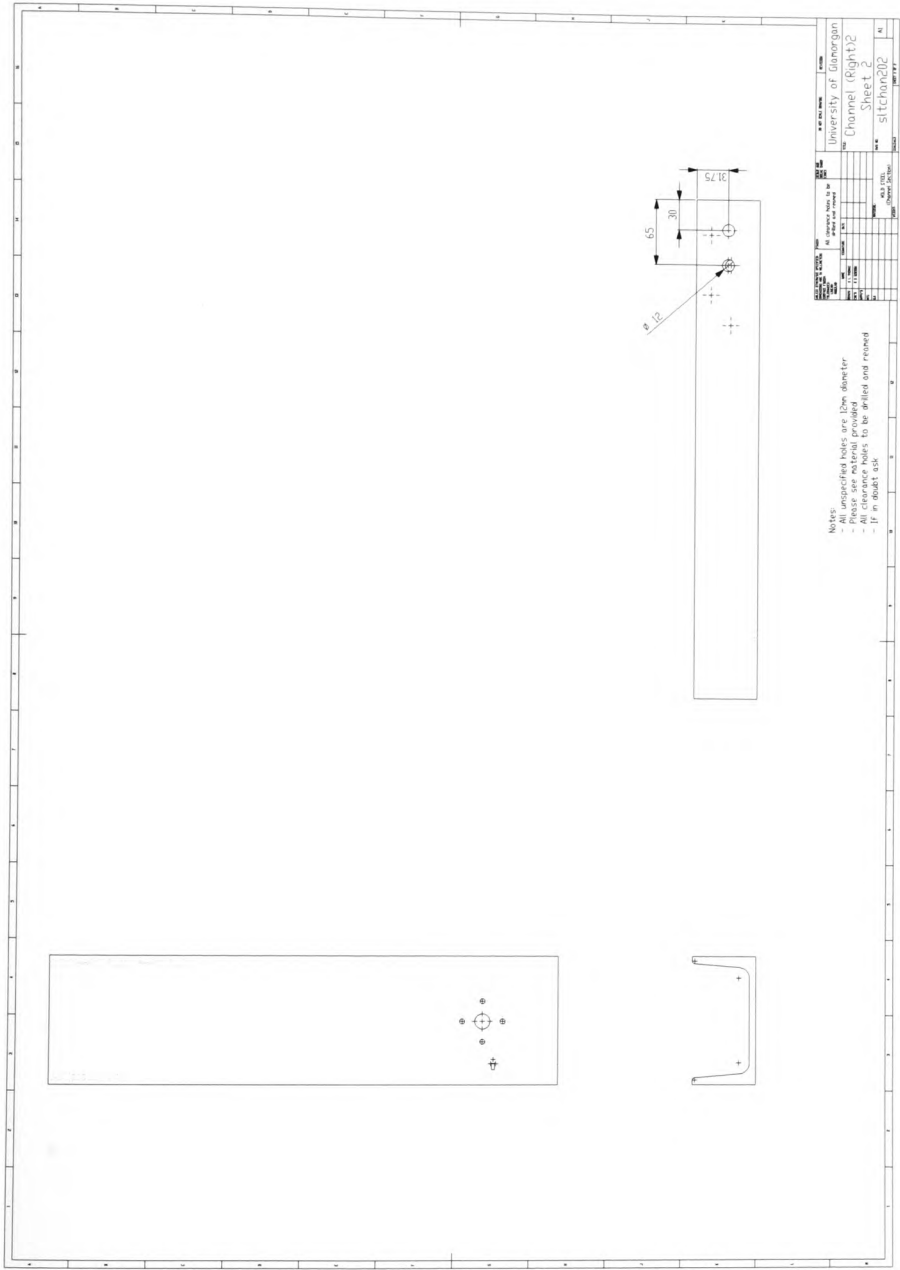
Manufacturing drawing of impact rig right hand strut (sheet 2)
